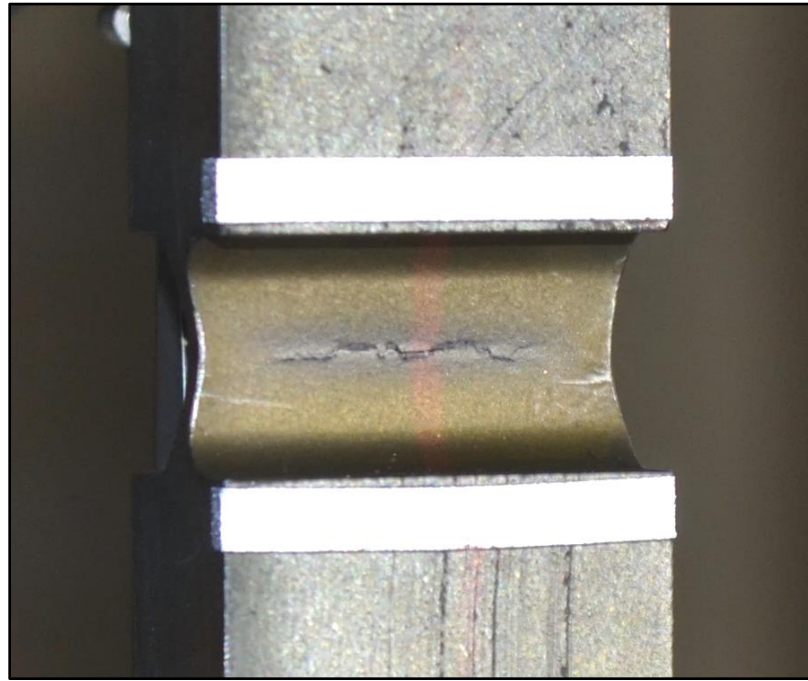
Thick Dog Bone Specimen: Macro View of Typical Partial Failure
